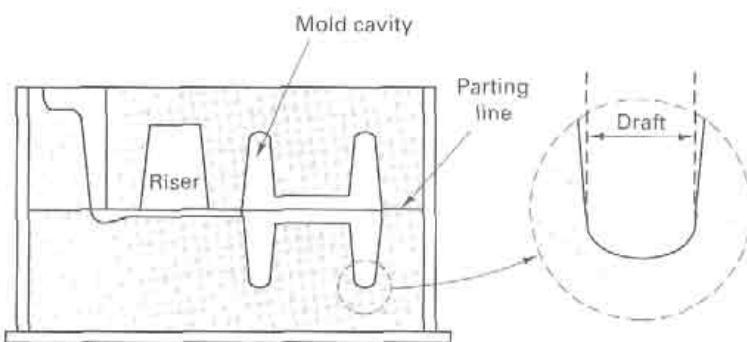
Two-part mold showing the parting line and the incorporation of a draft allowance on vertical surfaces.
